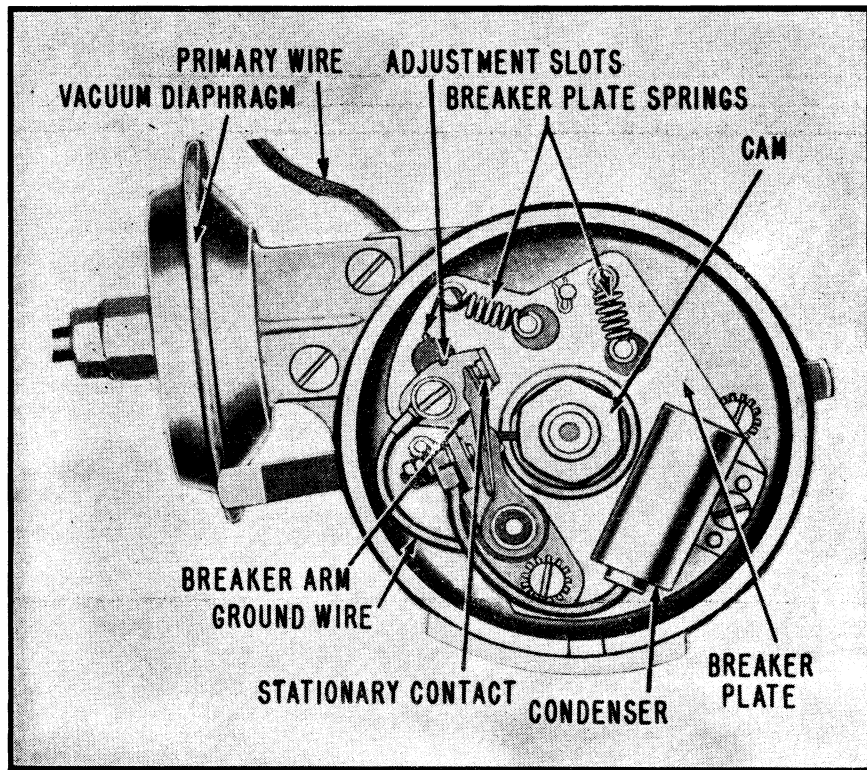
Breaker plate details of Holley "full vacuum" distributor
